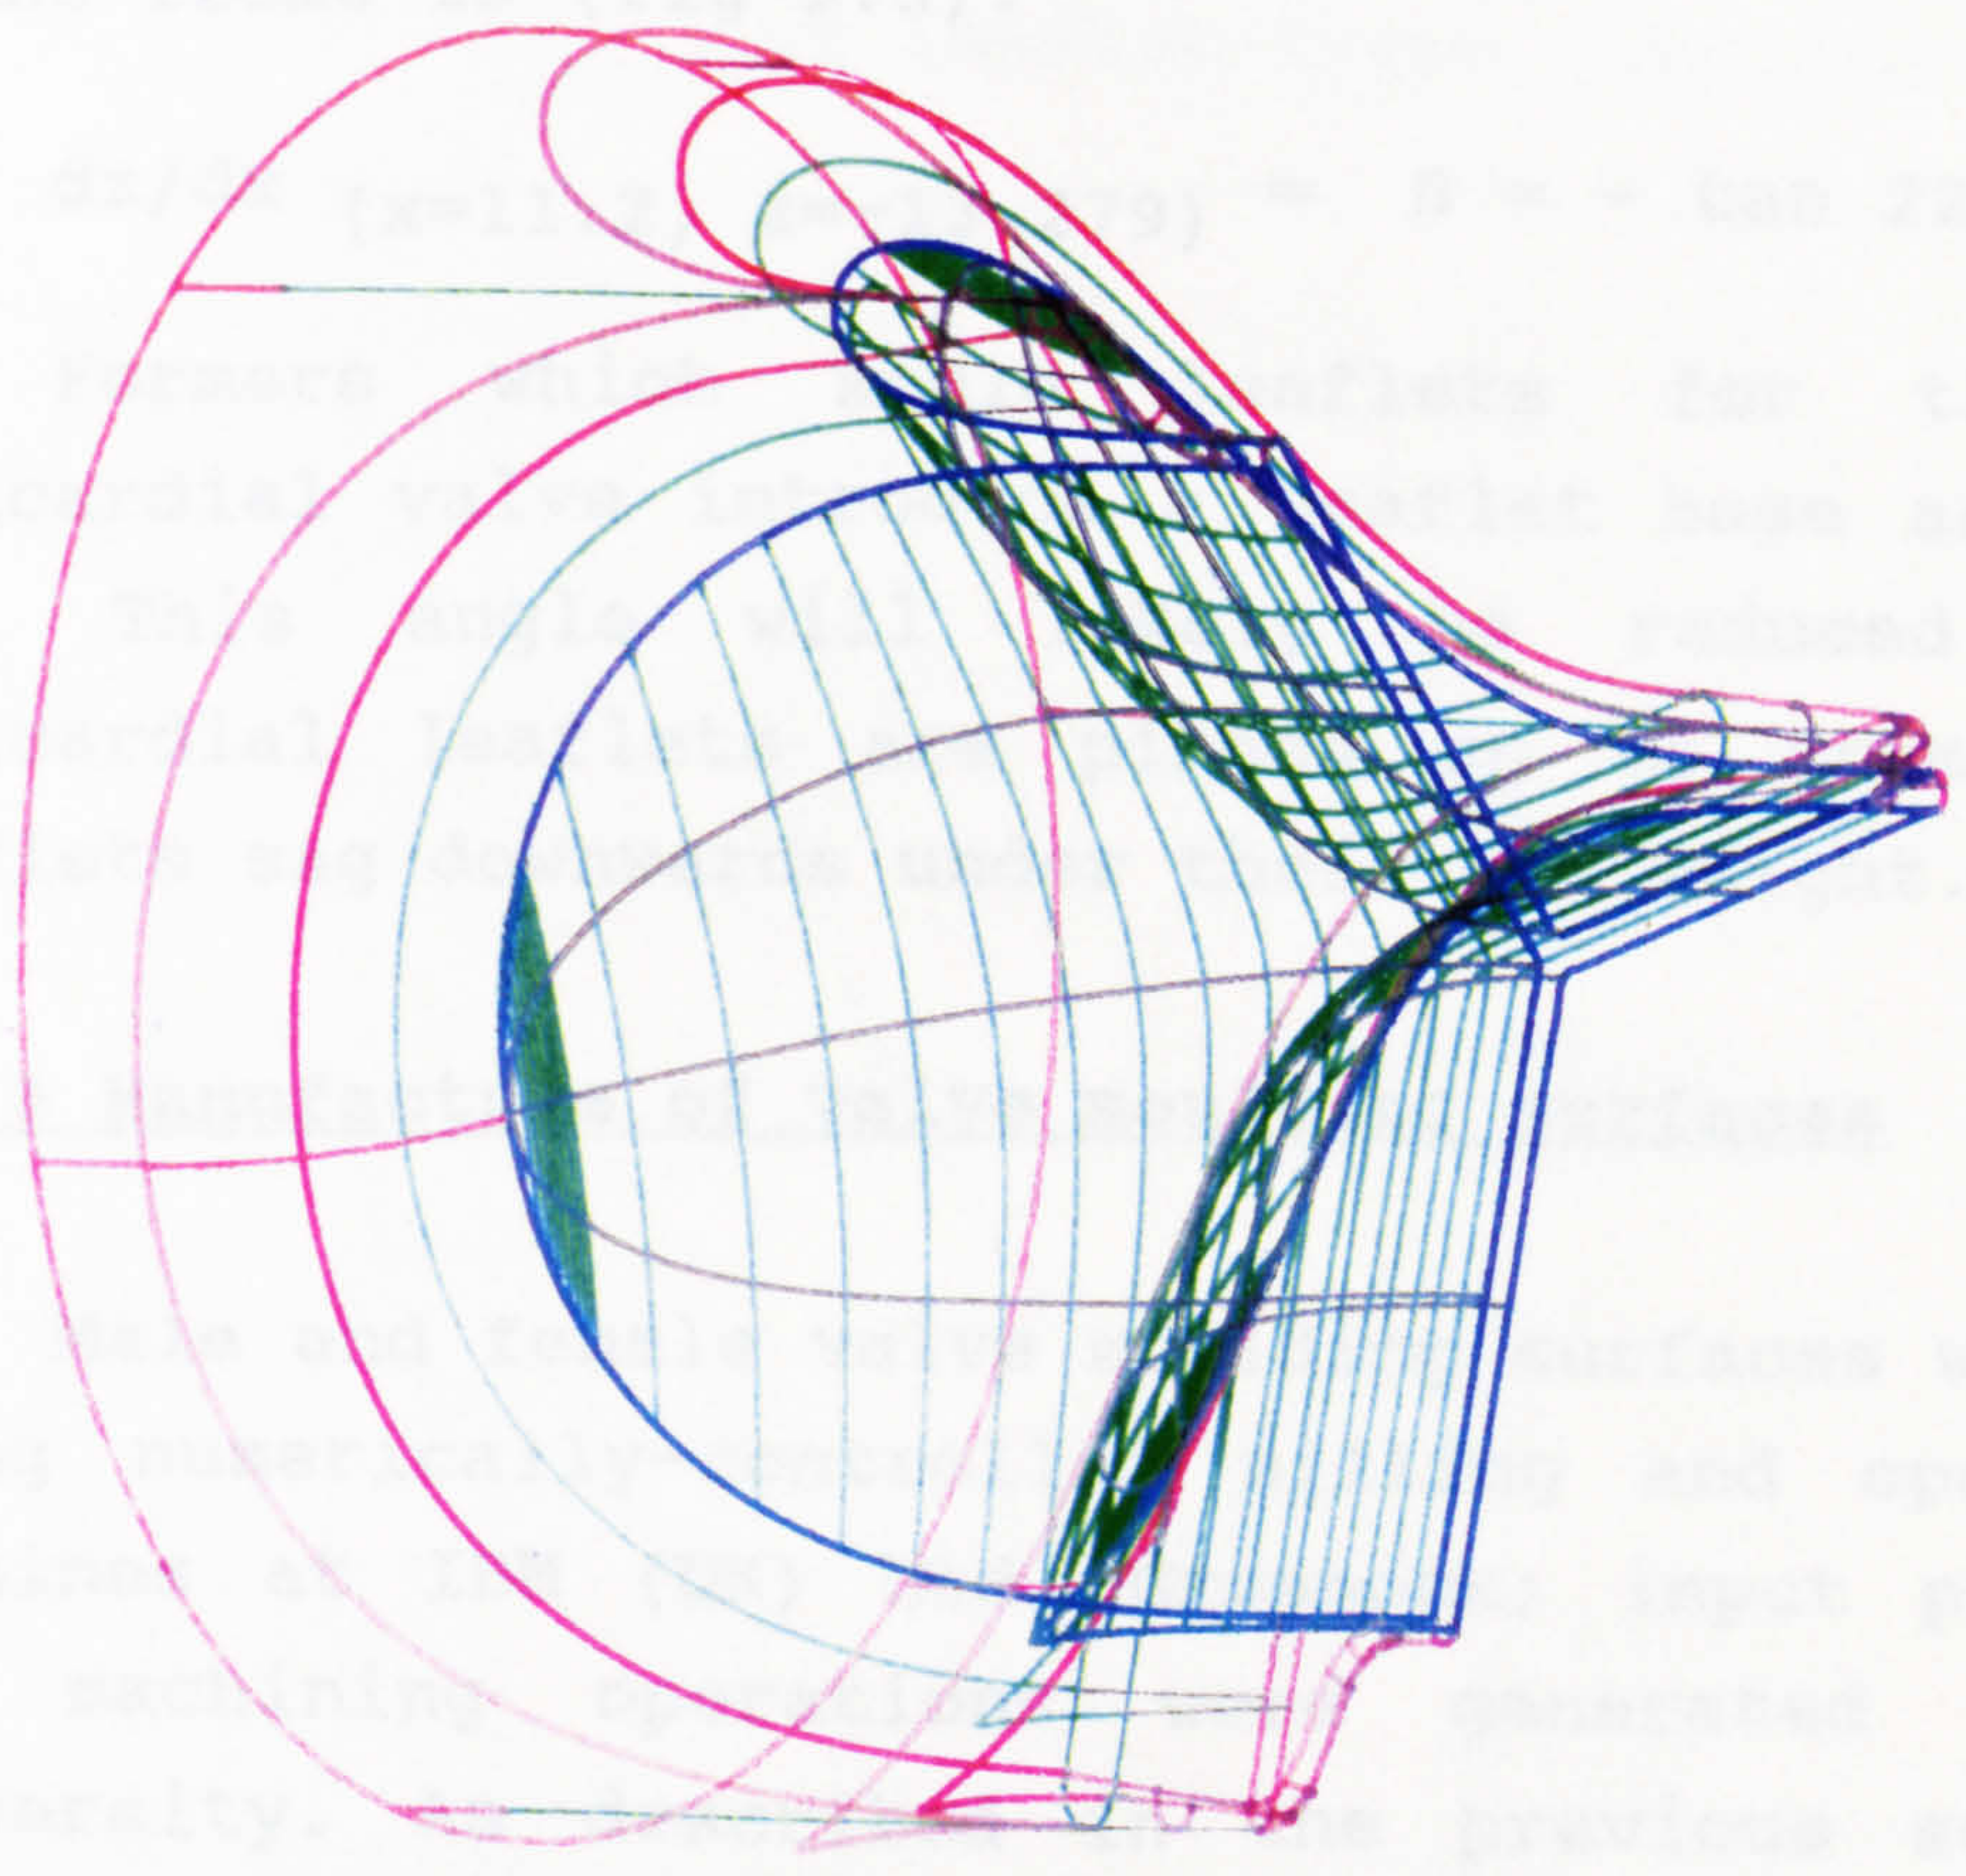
Isometric view of original valve design for IBM moulding tool
